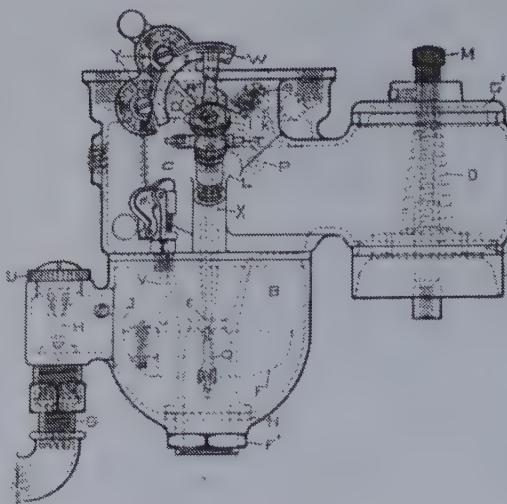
Adjusting a Model "L" Schebler Carburetor
